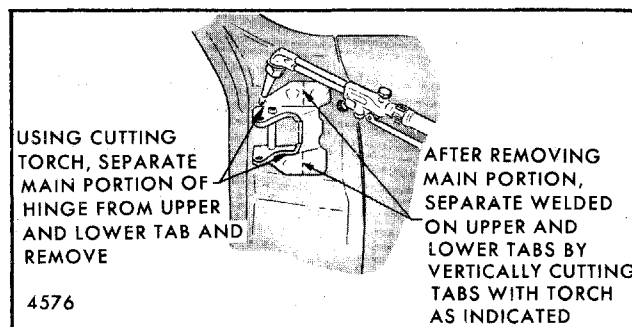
Body Side Hinge Strap Removal - "X" Styles Shown, "H" Styles Similar
